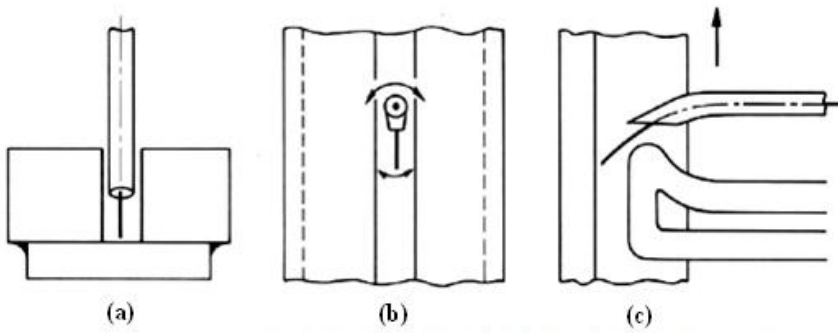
Bent contact-tip: (a) end view, (b) top view, (c) side view including copper bend weld pool support [Halmoy E, 1983]
